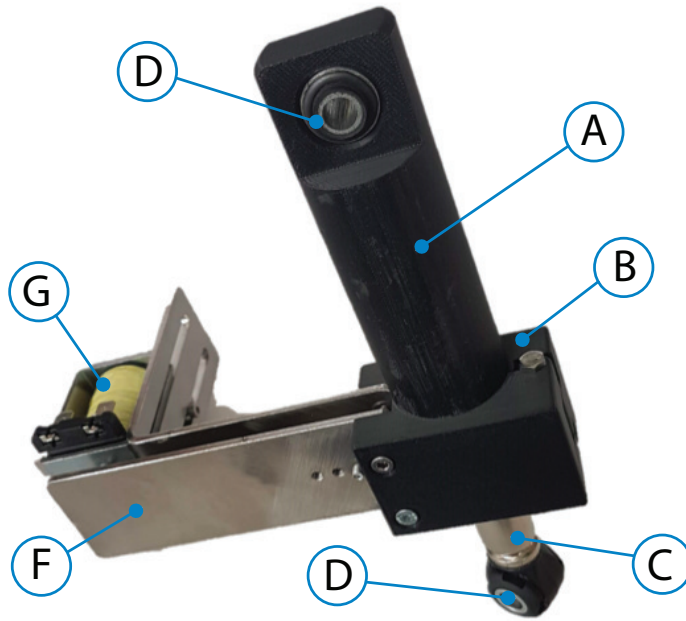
Front view picture of the mechanical design of the semi-active damper.
